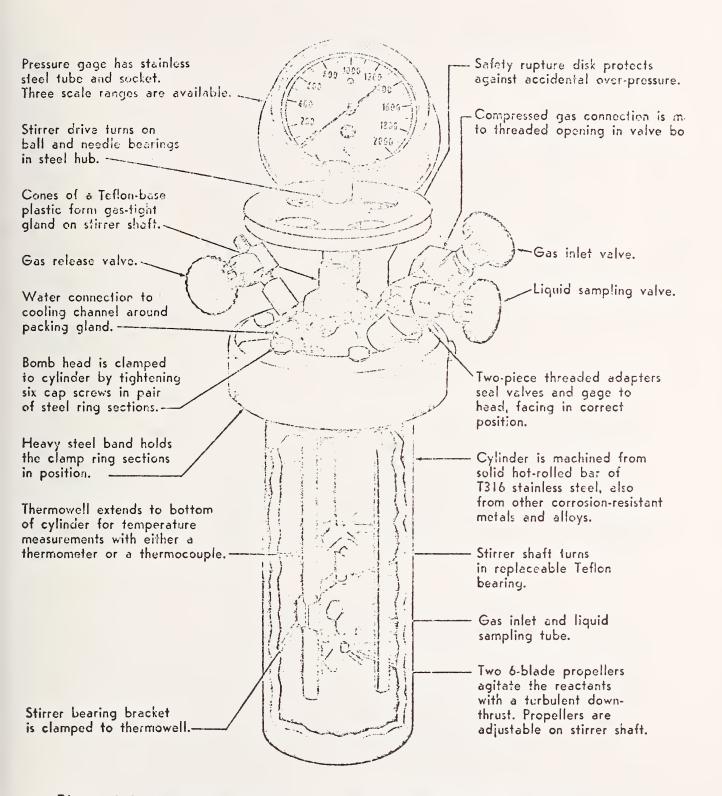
Sectioned view of the pressure reaction apparatus shows the principal parts of the 2000 ml. bomb.
